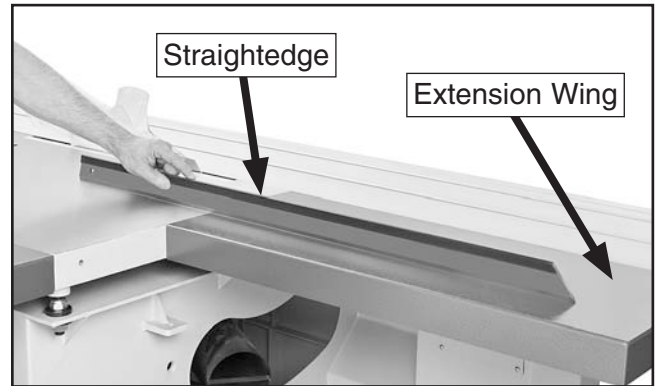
Using a straightedge to make sure the table/wing top surfaces are even.
